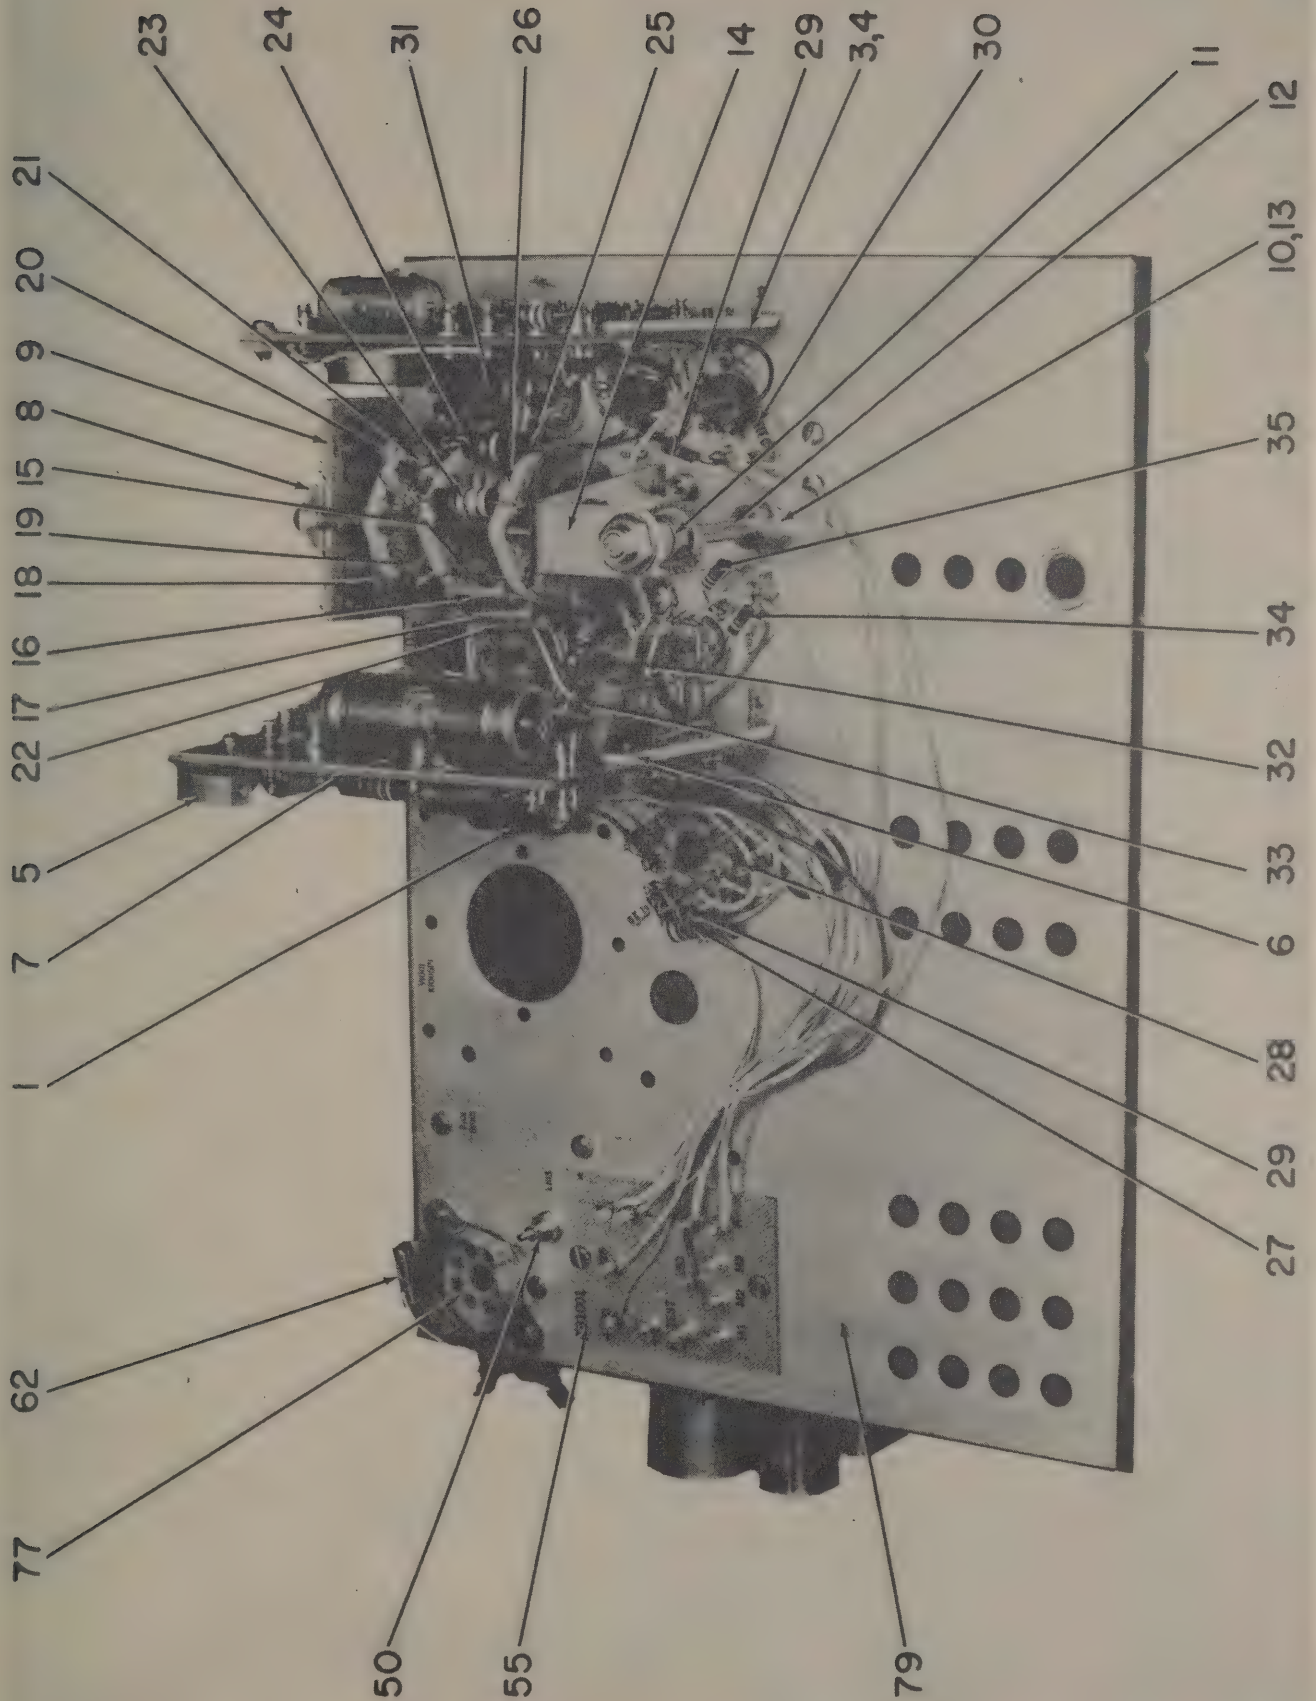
Vertical Chassis Assembly - Inside View (Sheet 1 of 3)
